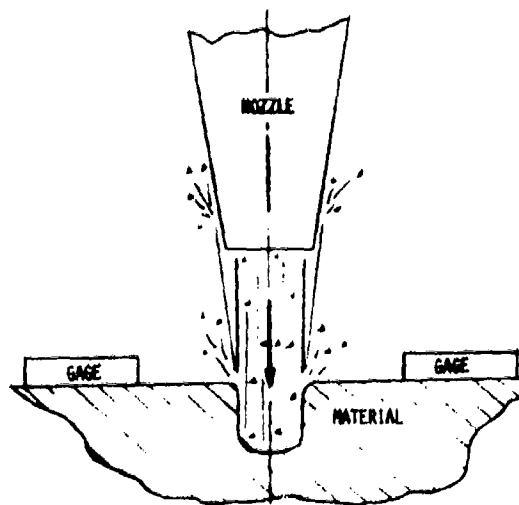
EXPERIMENTAL SETUP FOR ABRASIVE JET MACHINING.
